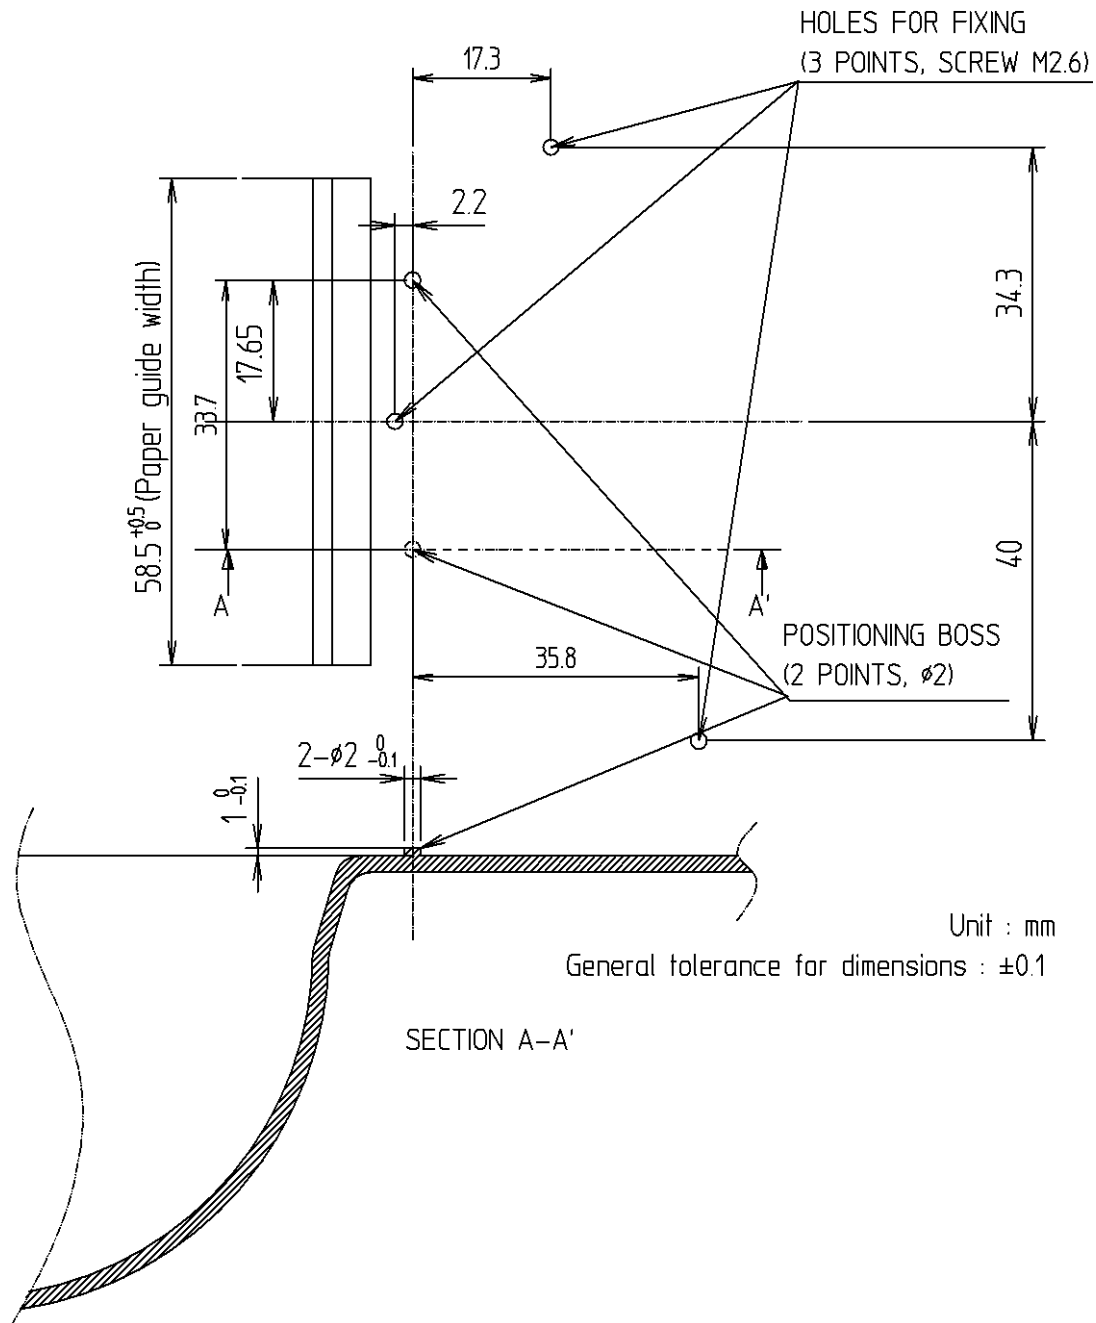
Position holes and boss dimension for mounting the mechanism
